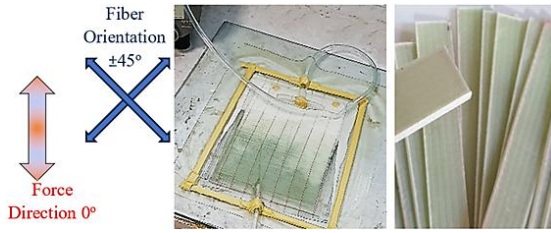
a) fiber orientation and loading direction, b) resin injection in VIP method, c) sample cut to ASTM D3039 standard dimensions
